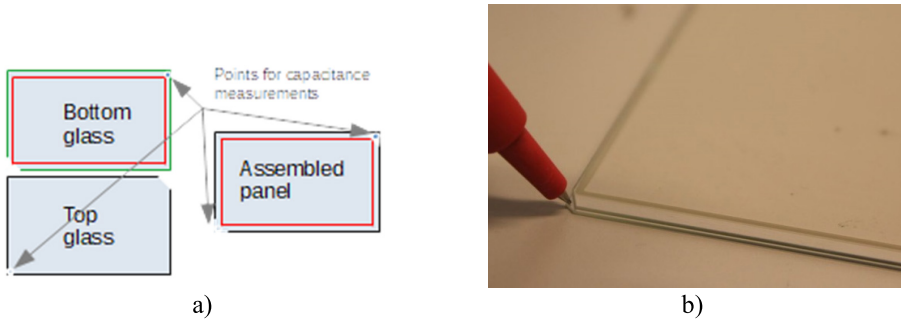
a) Assembled panel capacitance measurement points; b) close-up picture of panel corner during the measurement.
